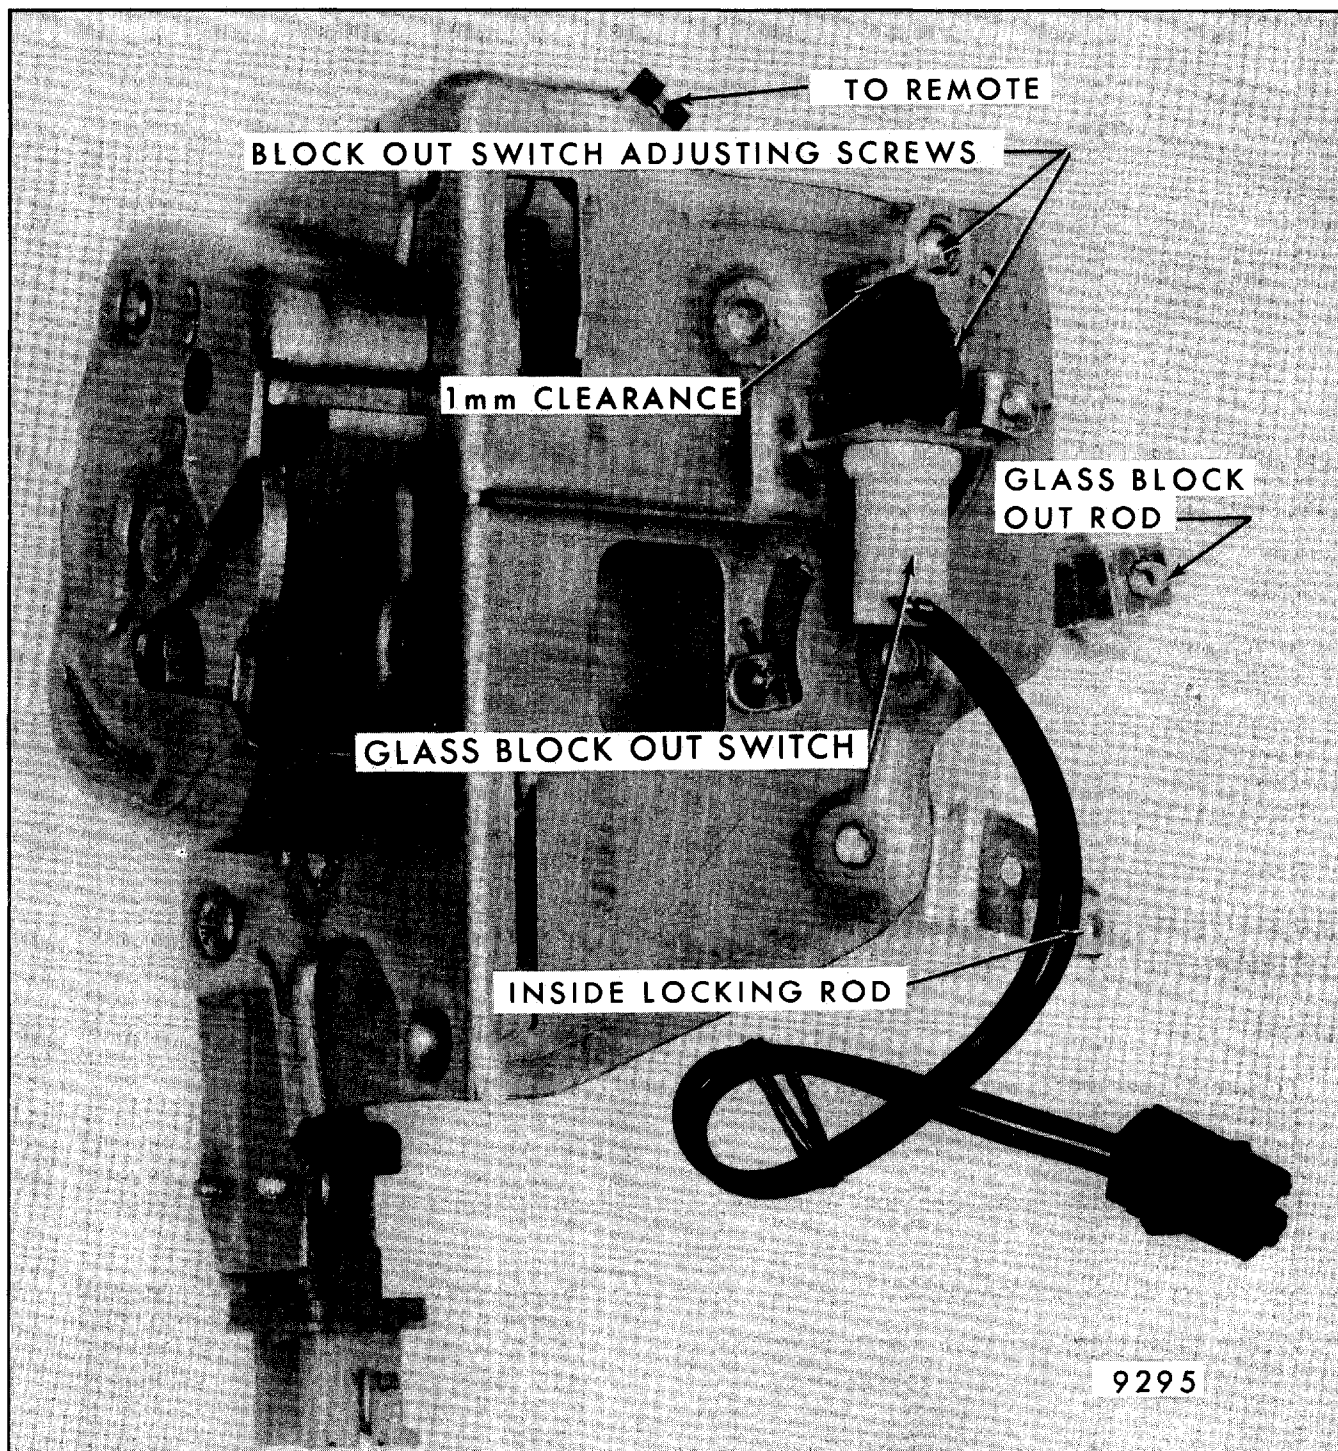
Tailgate Upper Right-Hand Lock Assembly
